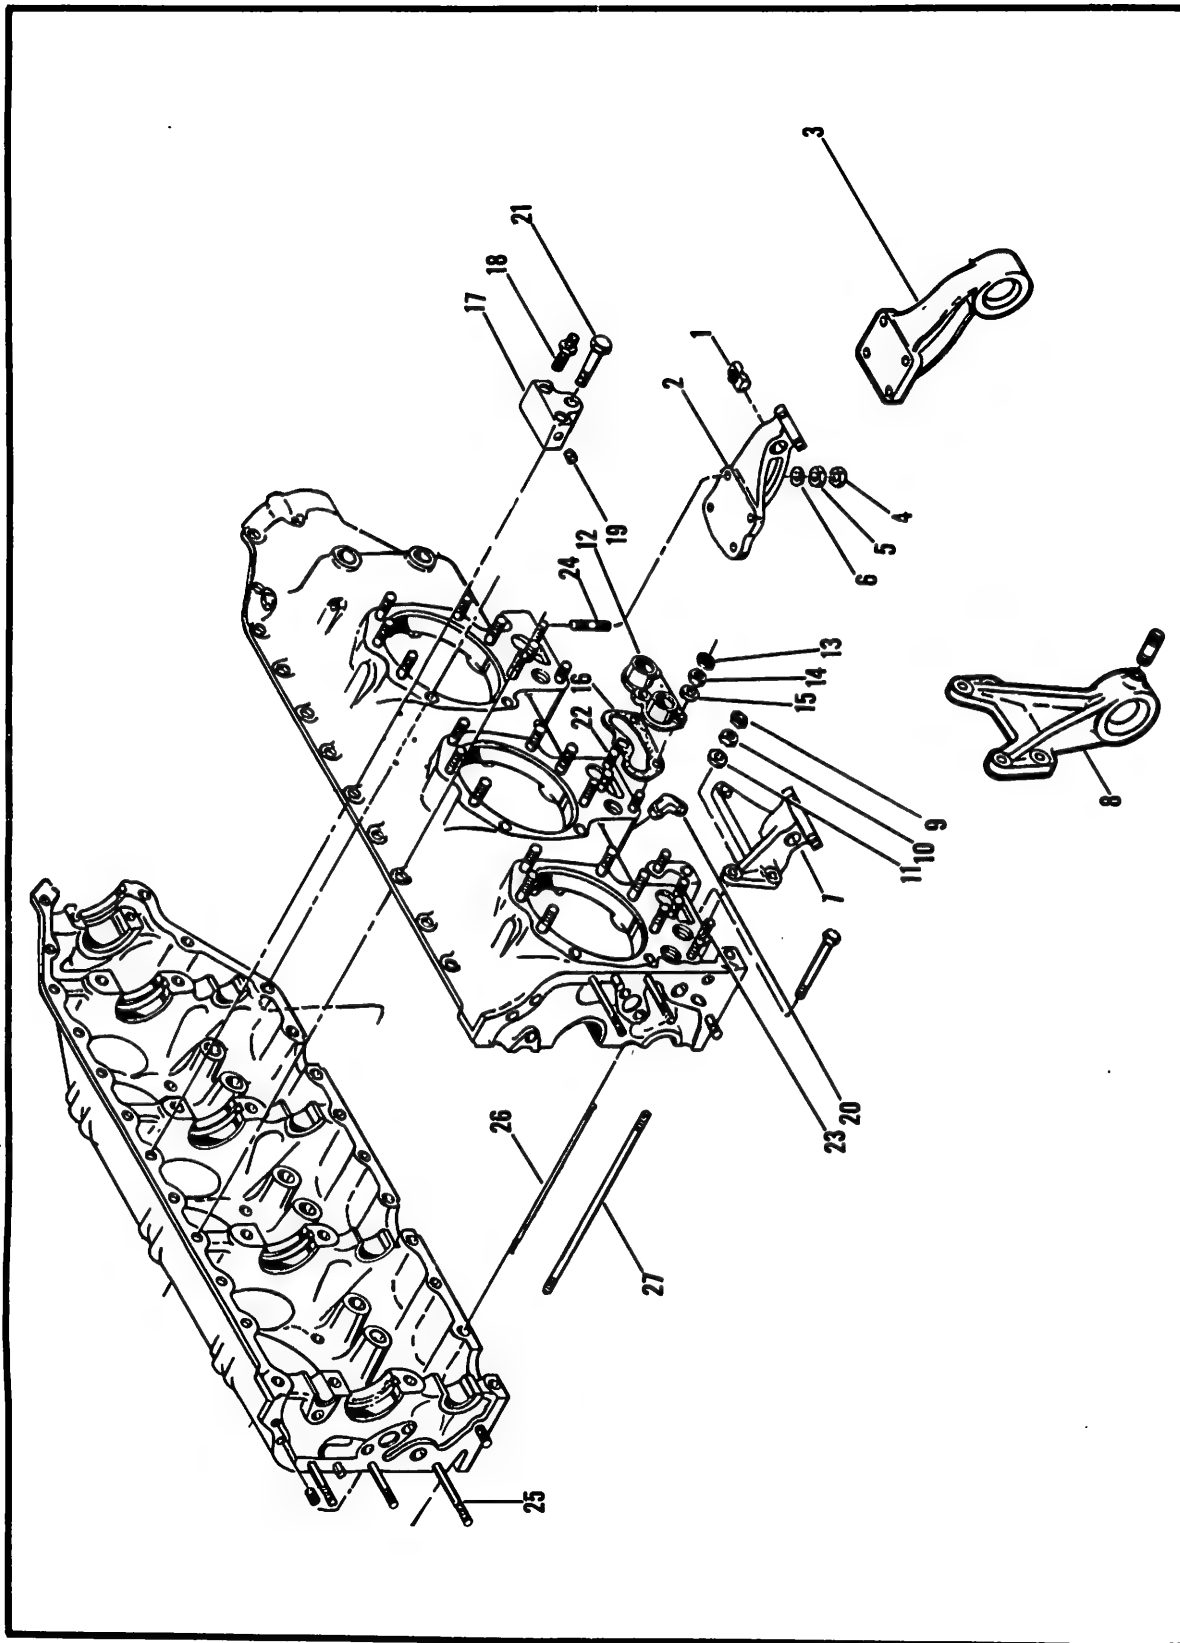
Pushrod Flange and Engine Mount Installation - Crankcase
